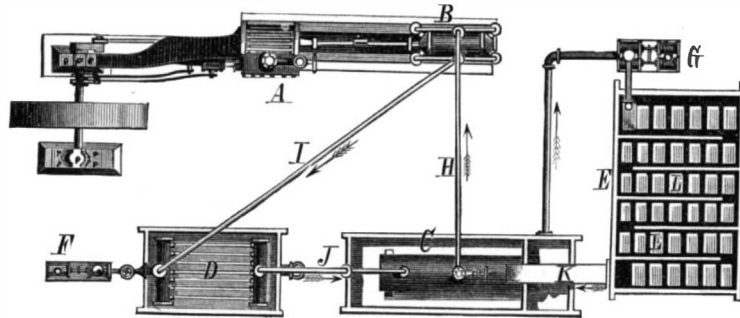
GENERAL PLAN OF ICE-MAKING MACHINE.
